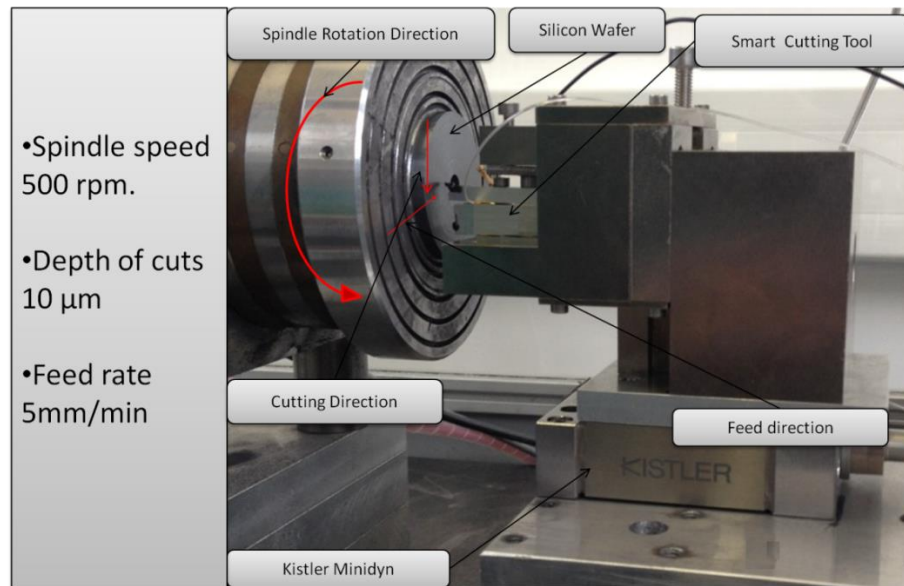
Cutting trials setup with the smart cutting tool on a self-developed customised cutting machine
